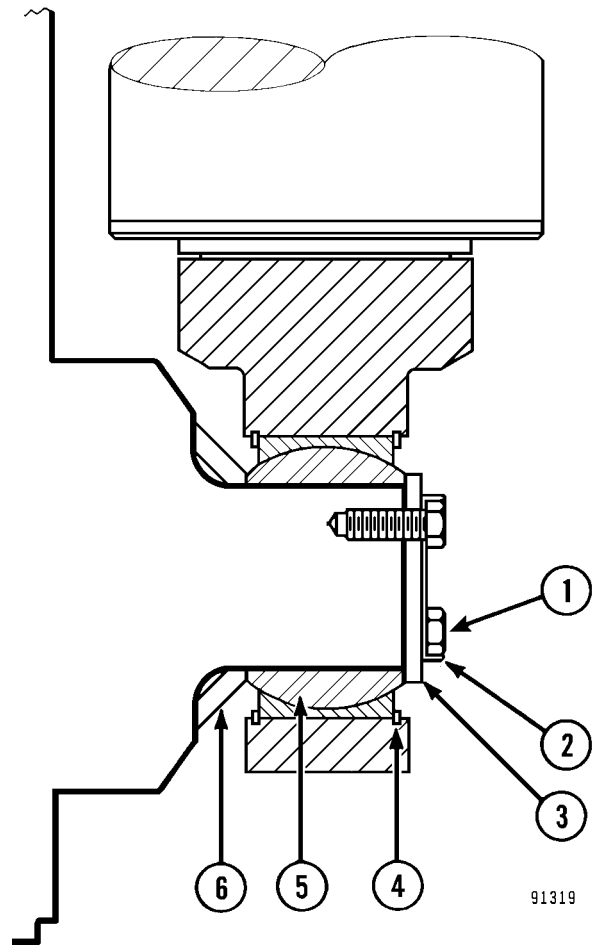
HOIST CYLINDER LOWER MOUNT
